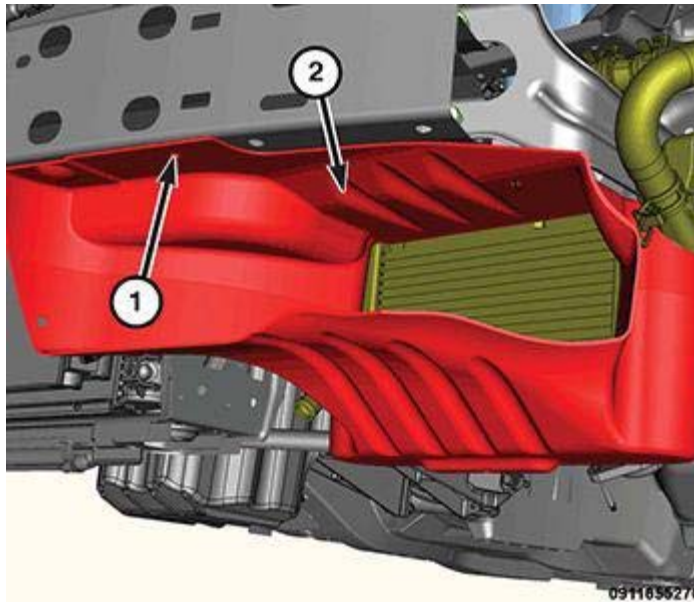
Low Temperature Radiator Shroud & Fasteners
